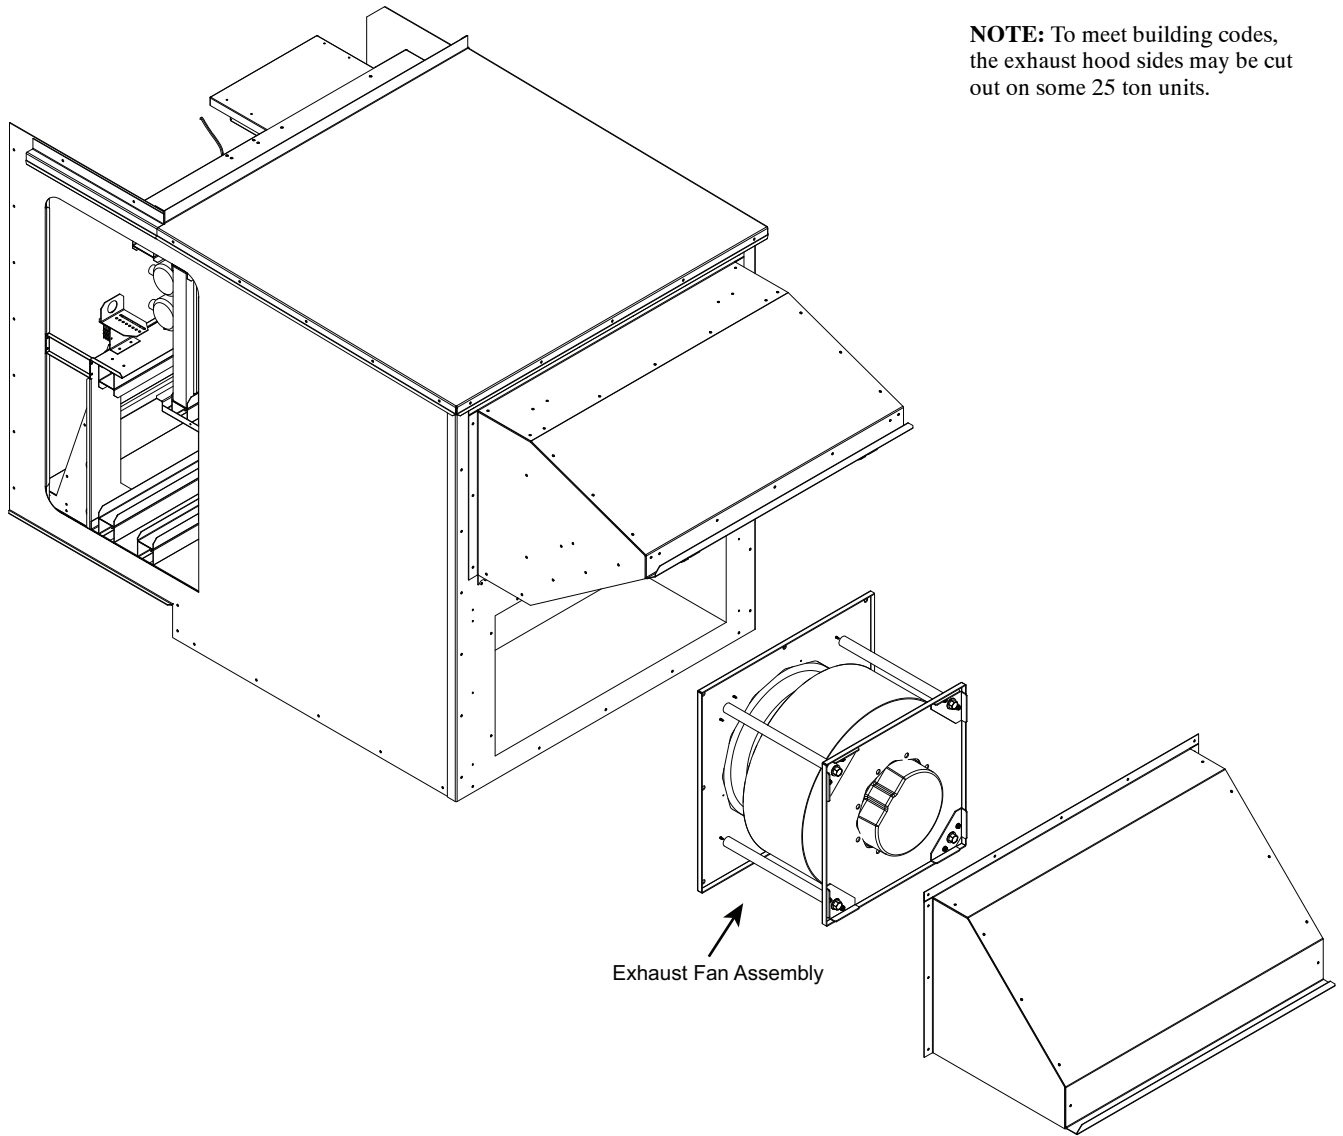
Exhaust Fan Assembly - Fastener Locations
